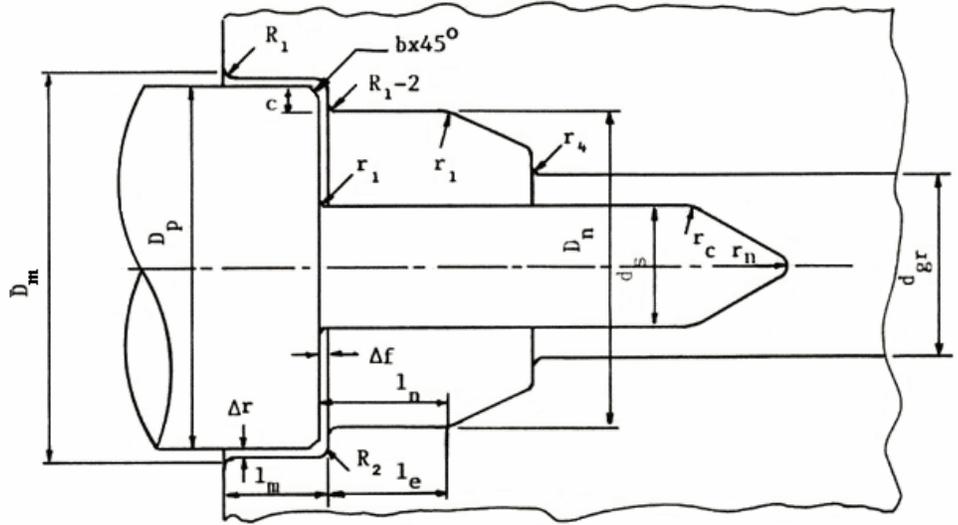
Die cavity in gripper die for forging with flash [3]
